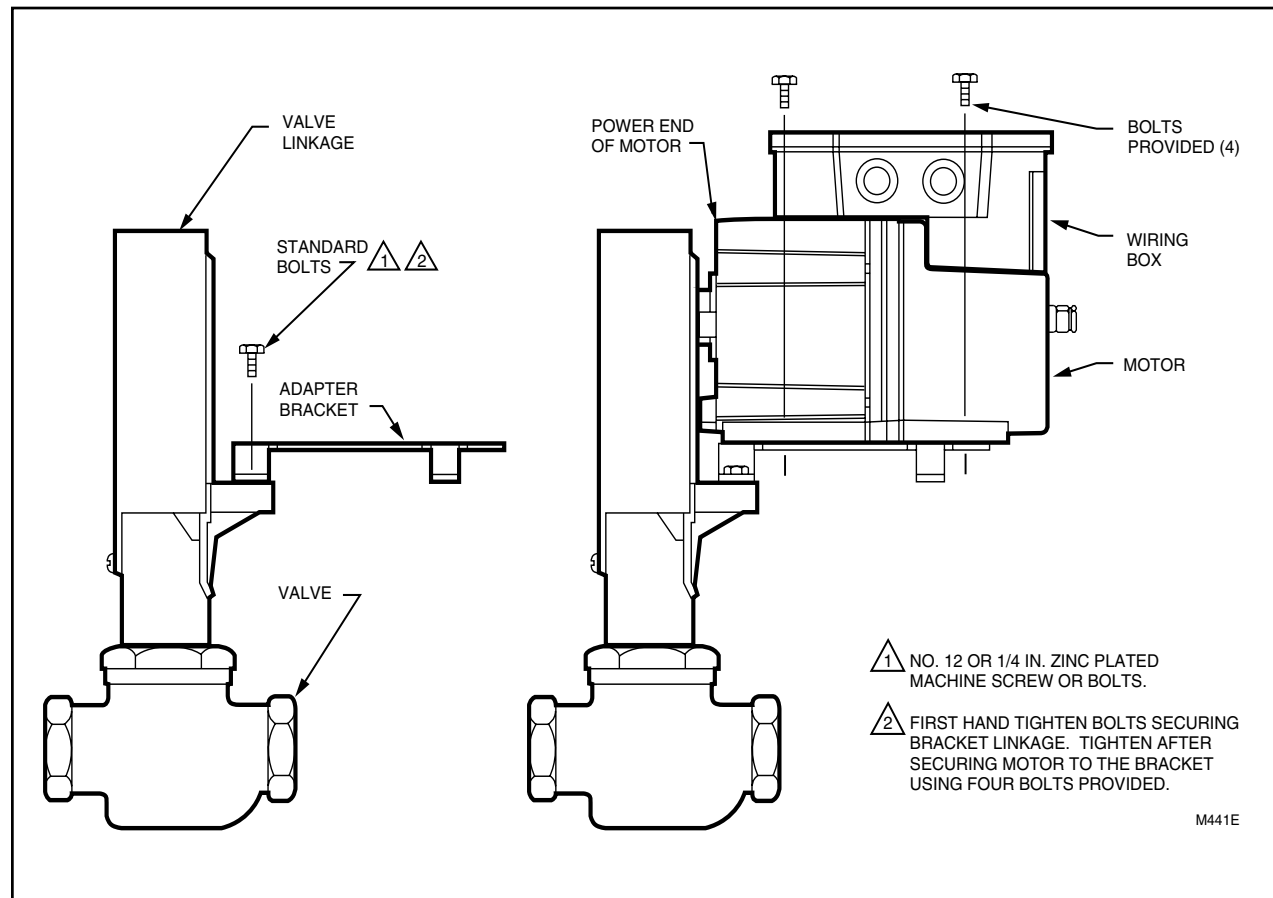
MOTOR MOUNTING ON VALVE LINKAGE.
